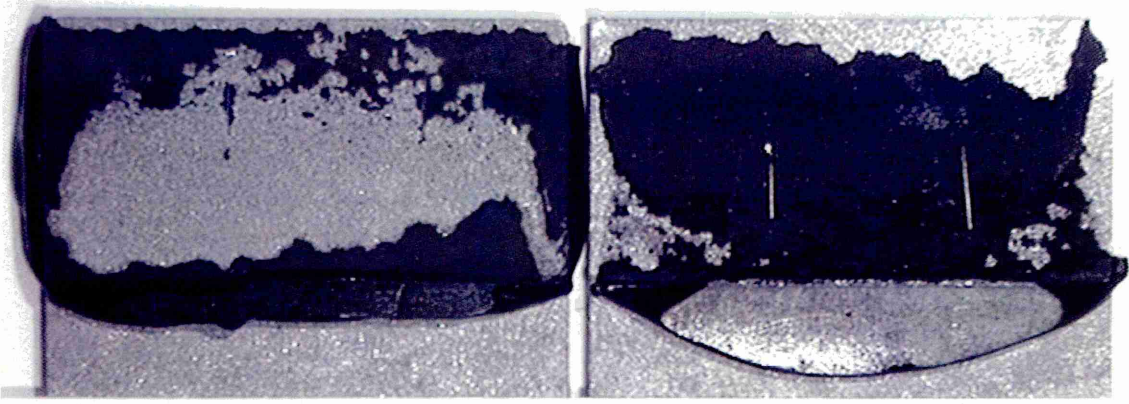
Fracture faces of specimen fatigue tested to failure after 48 weeks exposure
